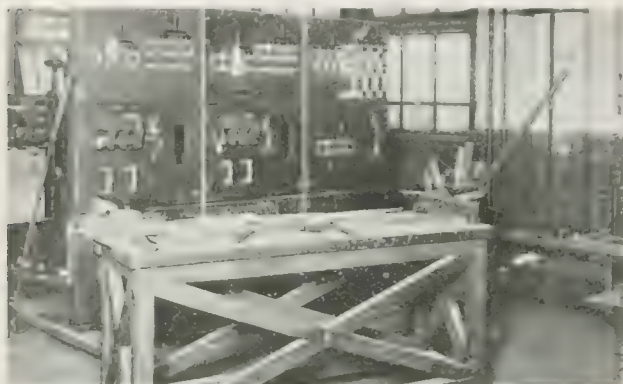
EQUIPMENT USED IN THE ASSEMBLY OF COMPLETE CONTROL PANELS
